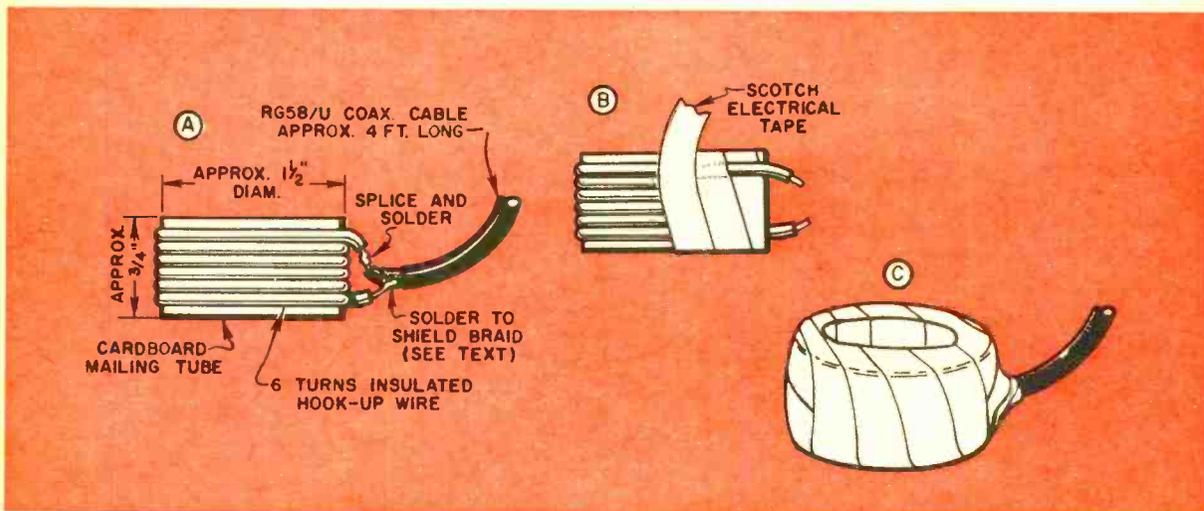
A step-by-step procedure for constructing the RF pick-up coil is shown in the drawing above. Black electrical tape holds wire to coil form.
